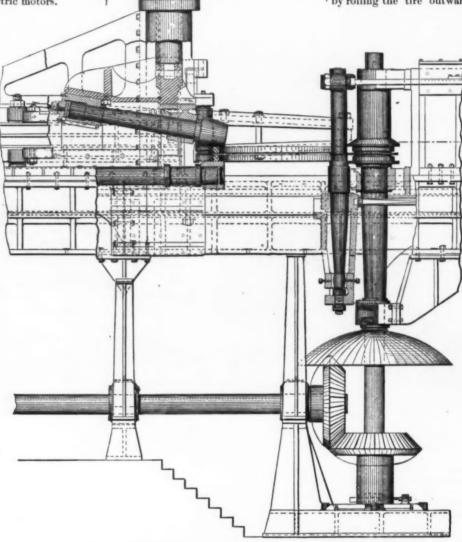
Side Elevation, Showing Mill Engaged in Rolling a Pair of Tires.
